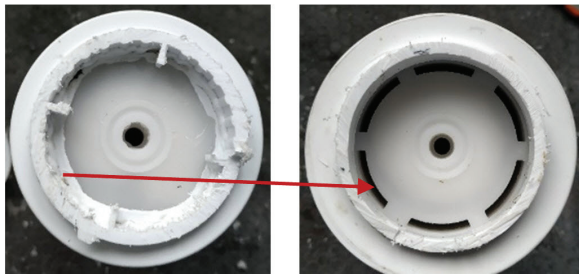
a) Current manufacturing sediment filter, and b) weld joint profile developed sediment filter
